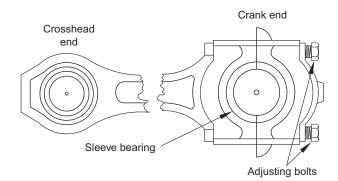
Schematic showing sleeve bearings on connecting rod.
